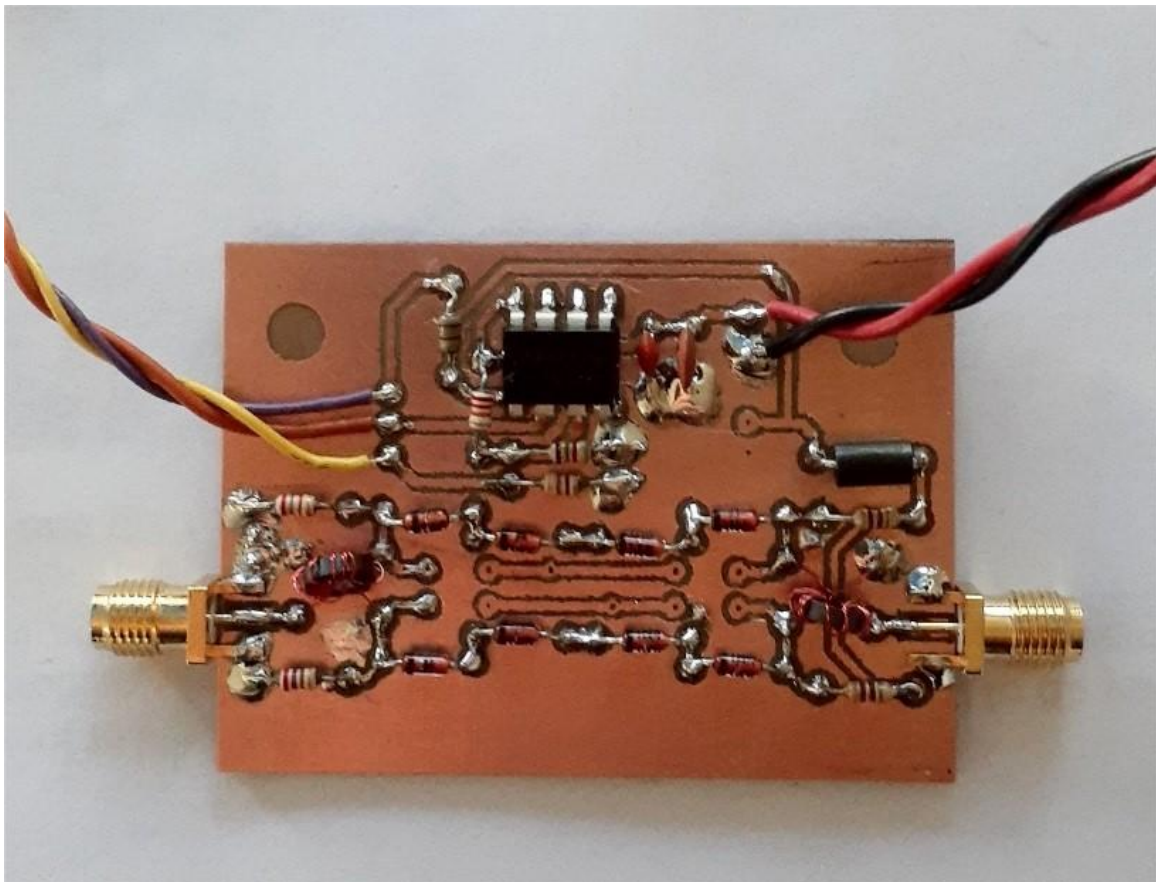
Here is the prototype which used standard through-hole parts. This shows the board without the capacitors C3 – C8 which proved unnecessary in this version. It is constructed on an undrilled etched single-sided PCB to allow it to be directly mounted over a ground-plane surface such as an aluminium chassis or front panel.
